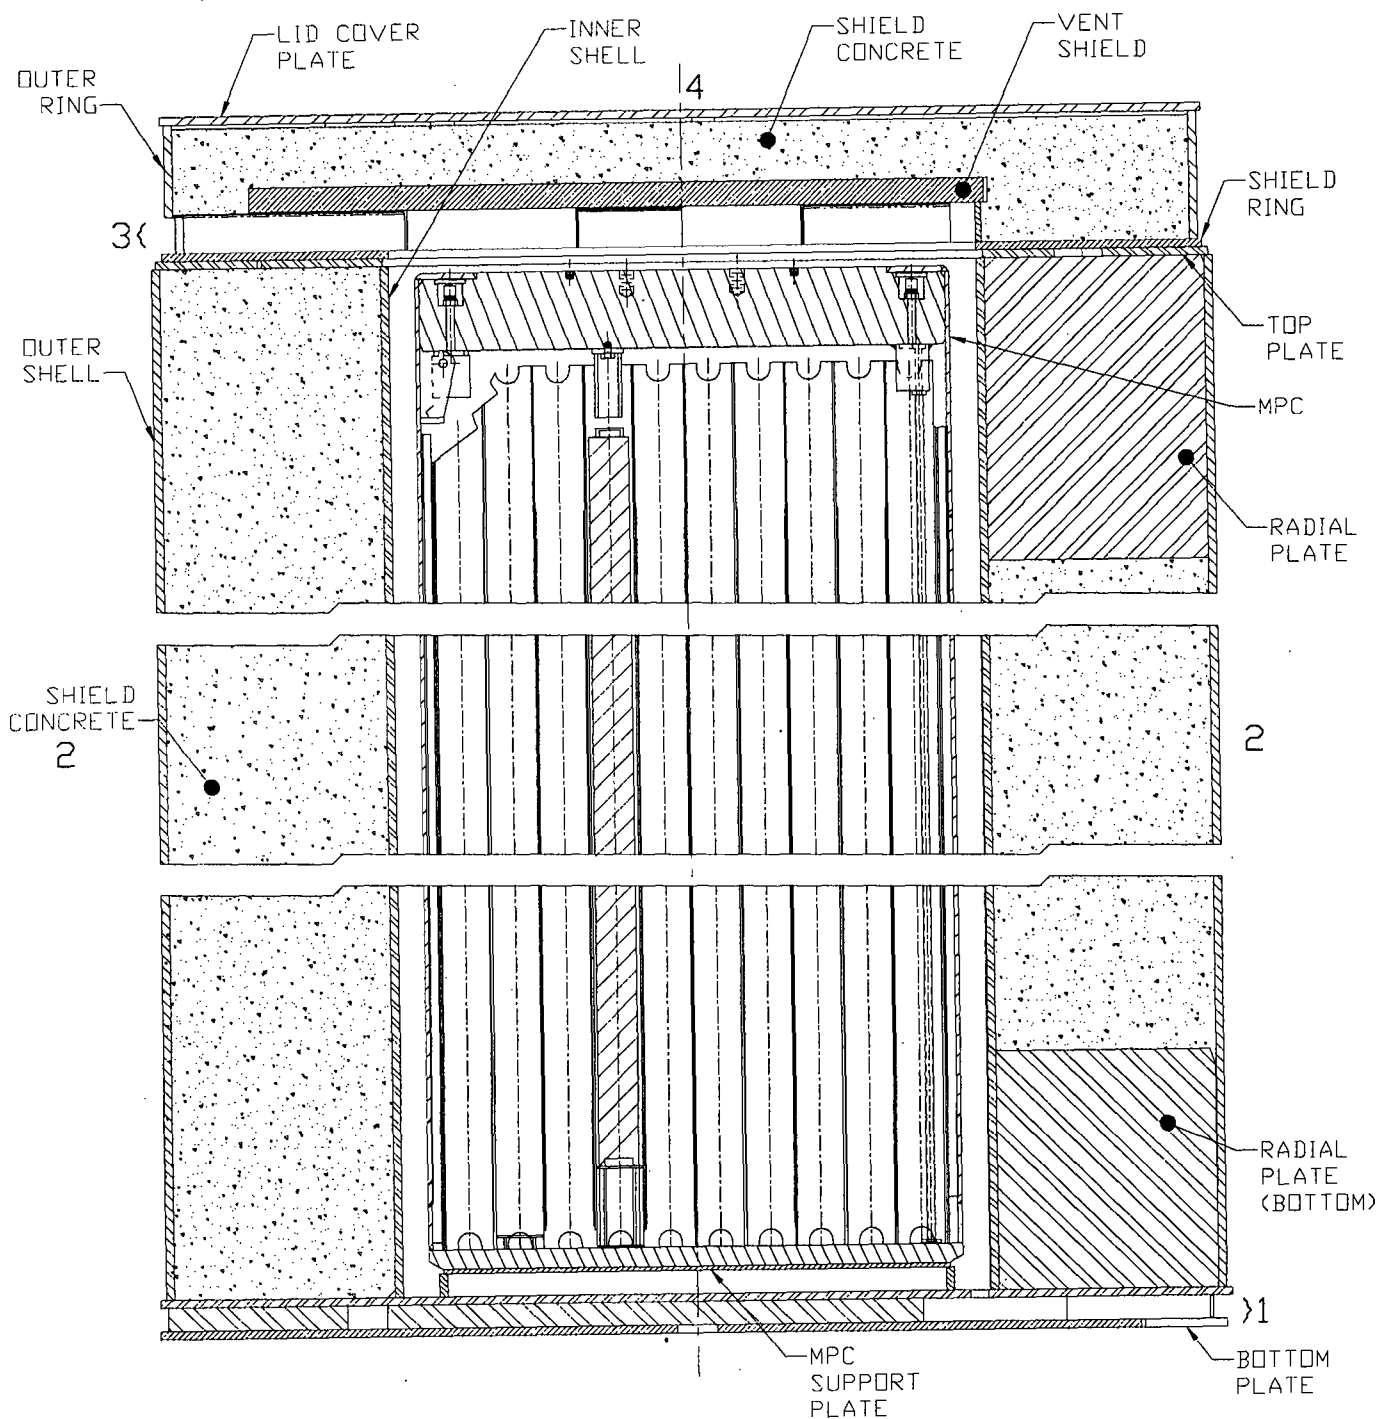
; HI-STORM 100S VERSION B OVERPACK CROSS SECTIONAL ELEVATION VIEW WITH DOSE POINT LOCATION
